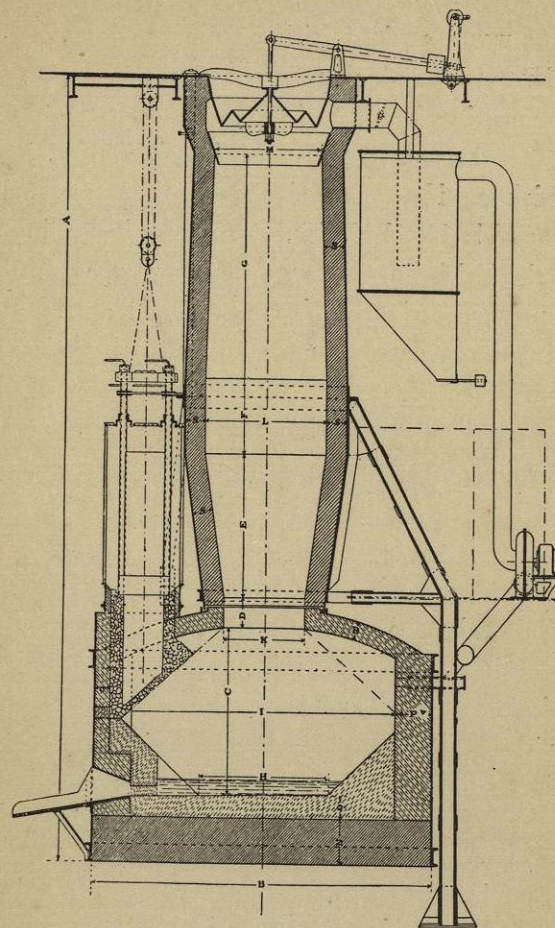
Frick Reduction Furnace (sectional elevation).
